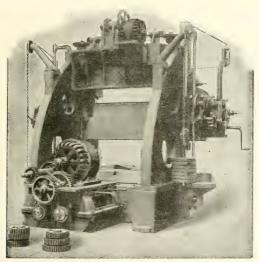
CONSTANT SPEED ELECTRIC DRIVE ON BORING MILL. MAIN DRIVE 15 HP, 1120 R.P.M. SQUIRREL CAGE INDUCTION MOTOR
